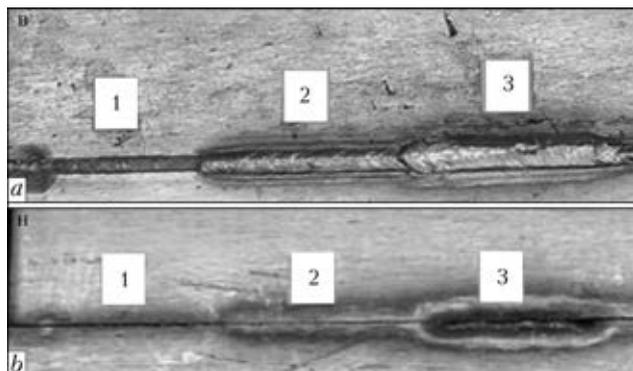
Appearance of the upper (*a*) and lower (*b*) sides of the butt joint on the specimens made from steel 08Kh17T ($\delta = 3.5$ mm): 1 – laser; 2 – plasma; 3 – hybrid welding
